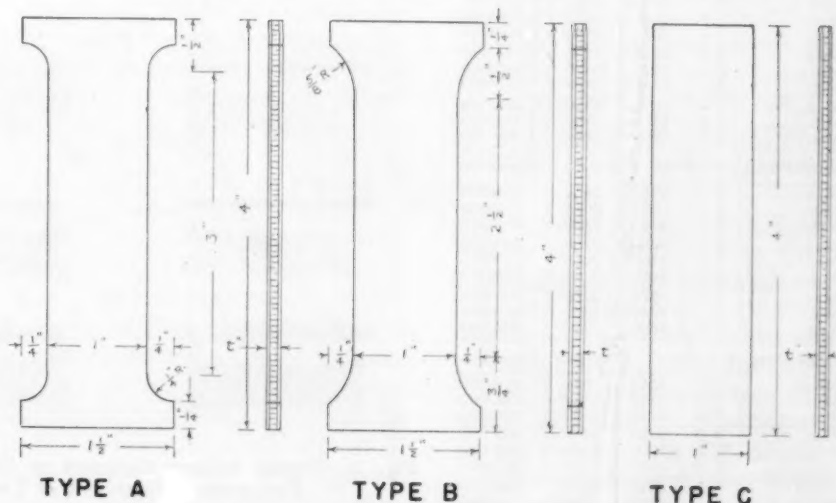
Design Details of Laterally Supported Plywood Compression Specimens.
